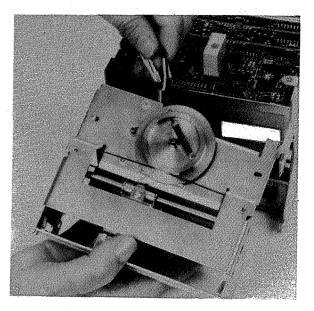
RELEASING PEN TRAY FIXING SCREWS
